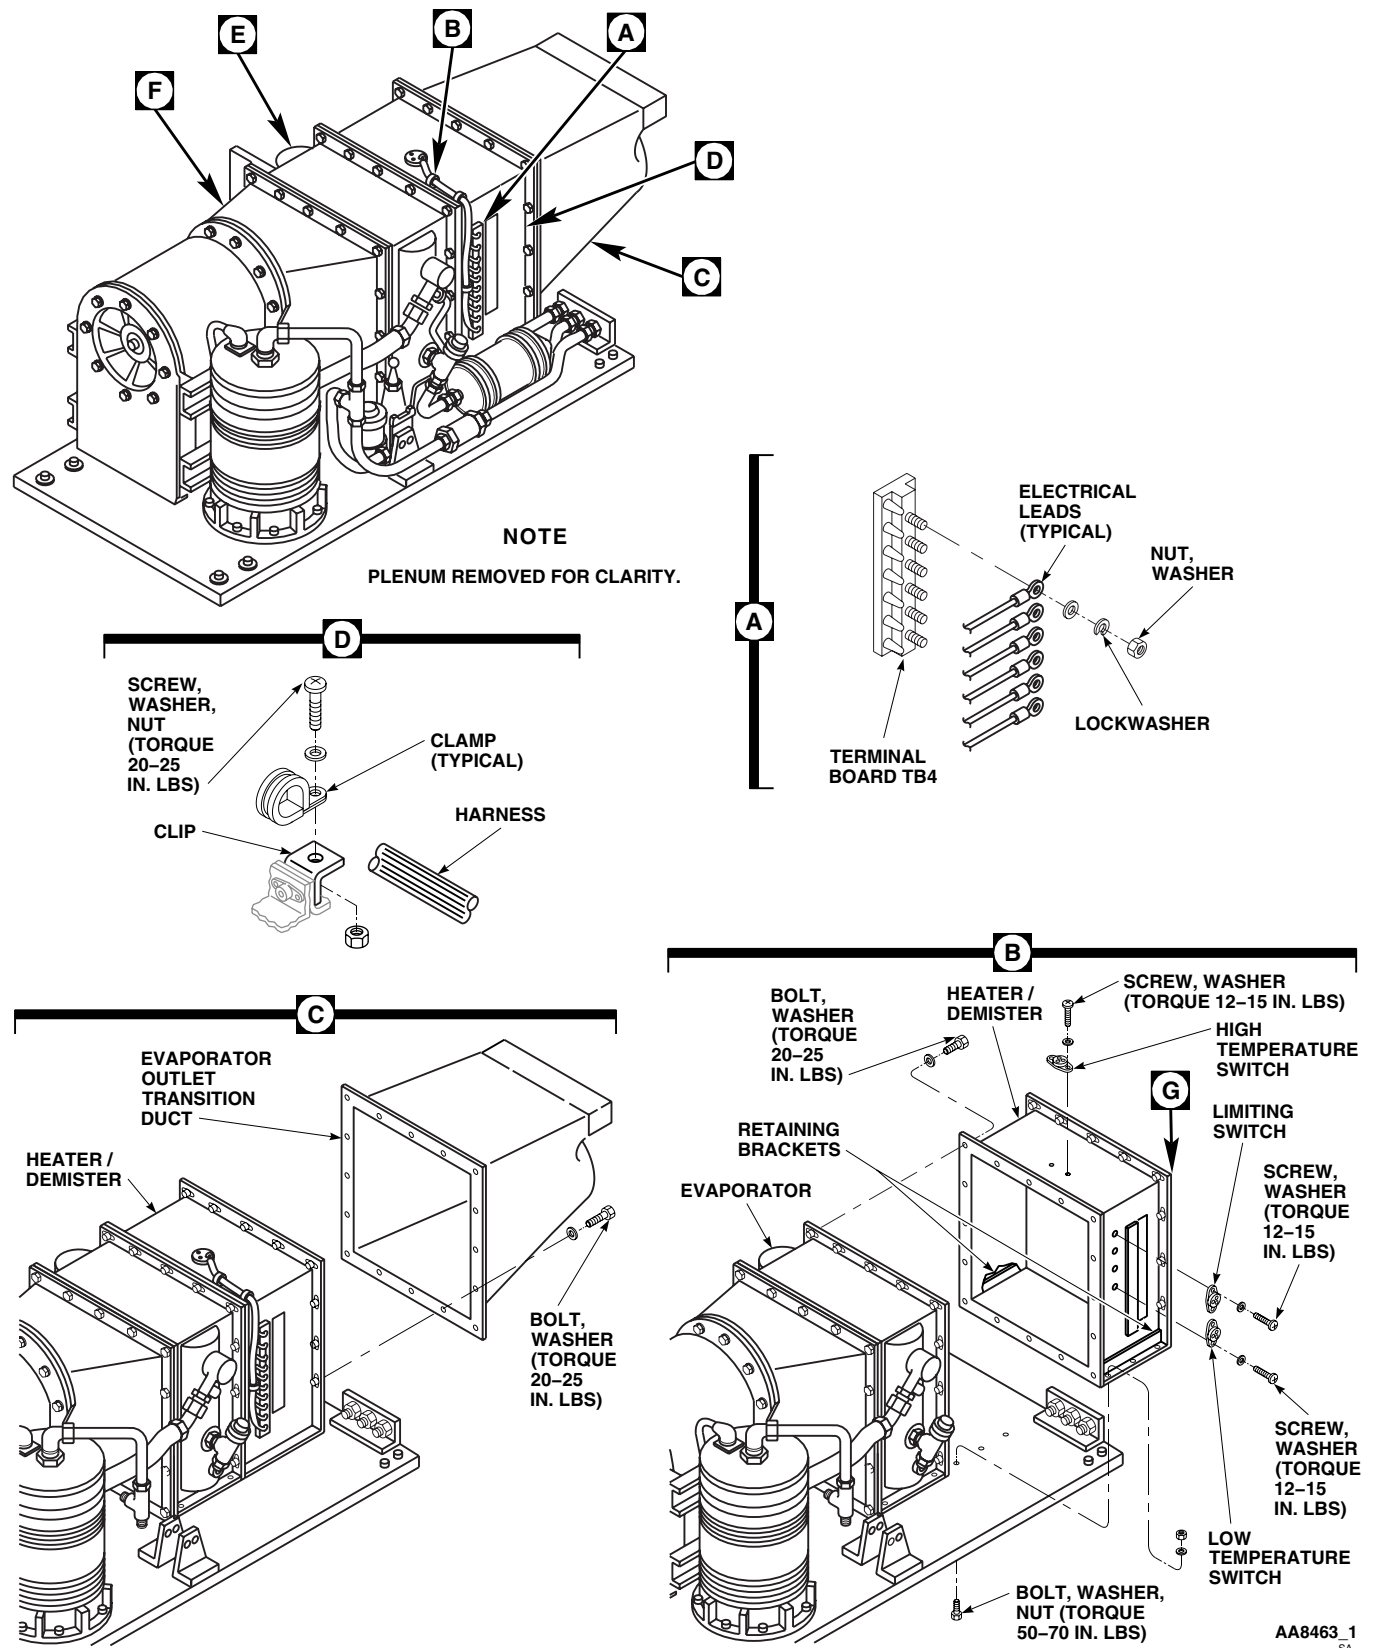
Replace Environmental Control System Ducts, Evaporator, Heater/Demister (AVIM). (Sheet 1 of 3)
